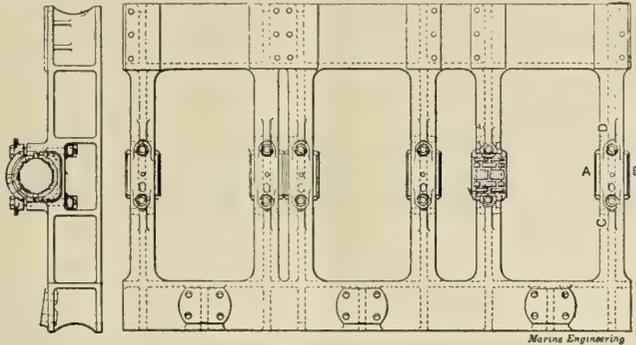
BEDPLATE FOR TRIPLE-EXPANSION ENGINE IN ONE CASTING
